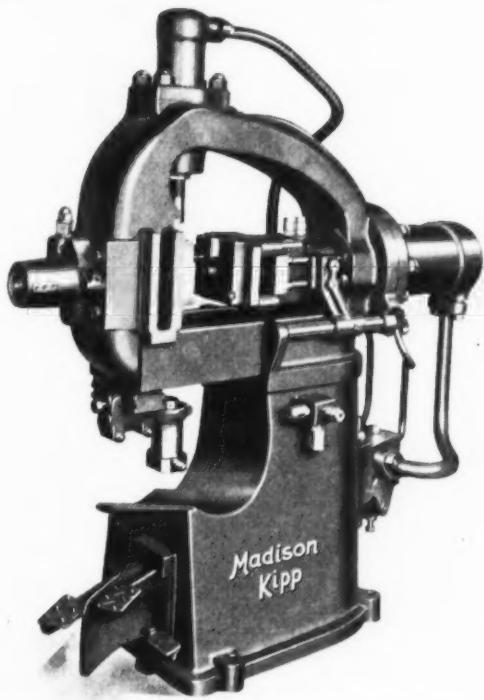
Die-casting Machine Recently Developed by the Madison-Kipp Corporation for Casting Brass and Aluminum in the Plastic State
